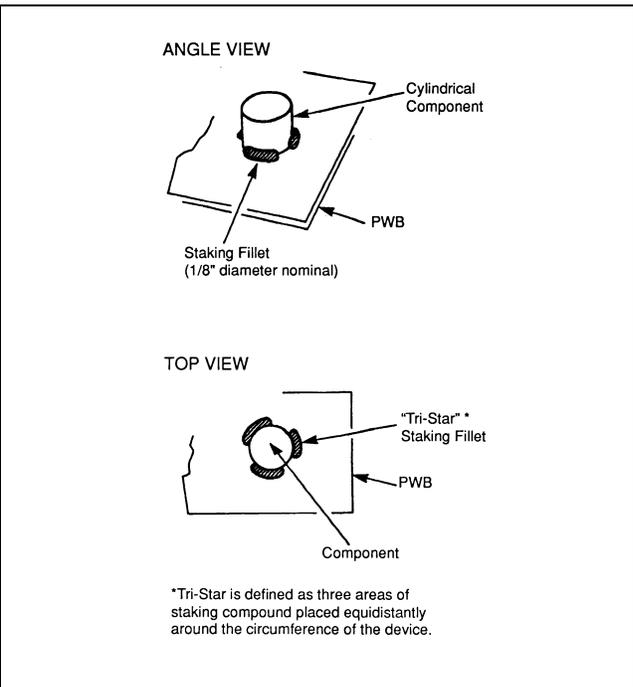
Typical Staking of Flush Mounted Cylindrical Components
